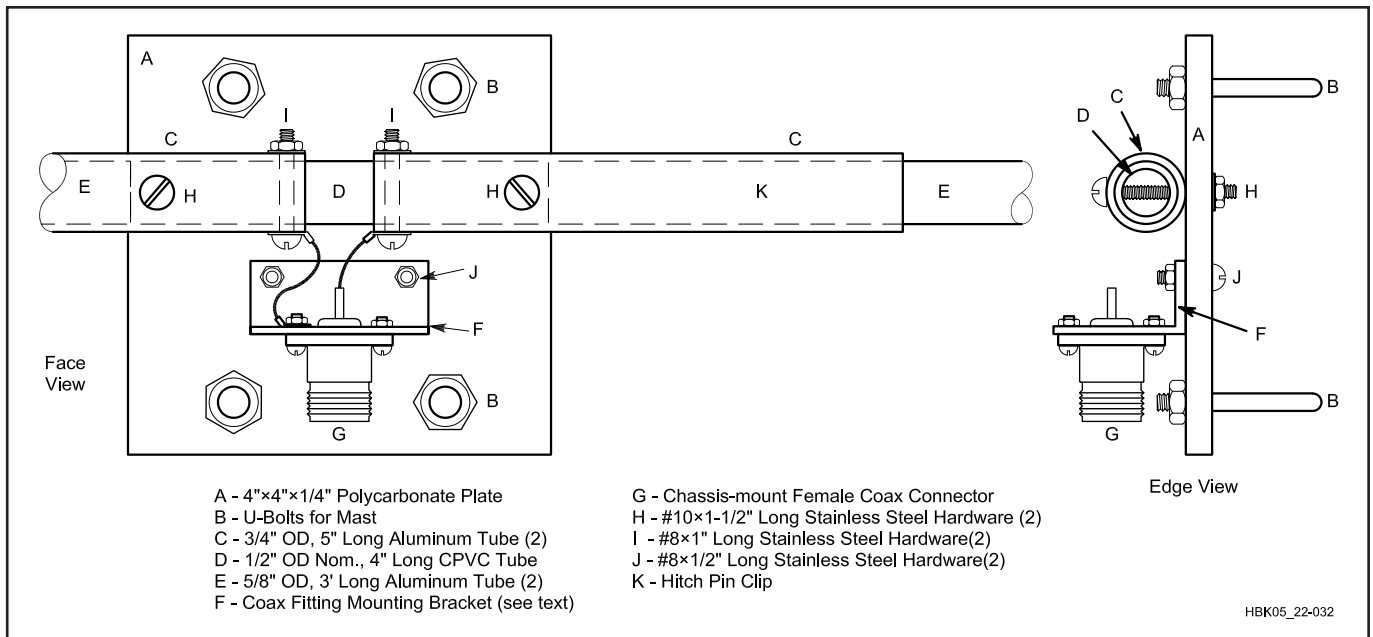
The element and feedpoint mounting plate, with details of the construction used in the prototype.
